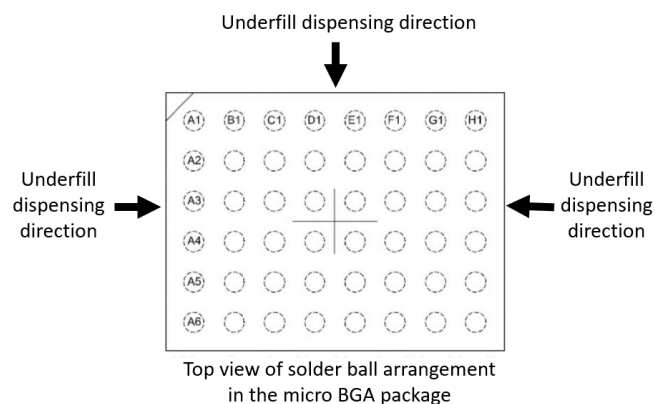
Illustration of top view of solder ball arrangement in micro BGA package and direction of the underfill dispensed to the micro BGA package.
